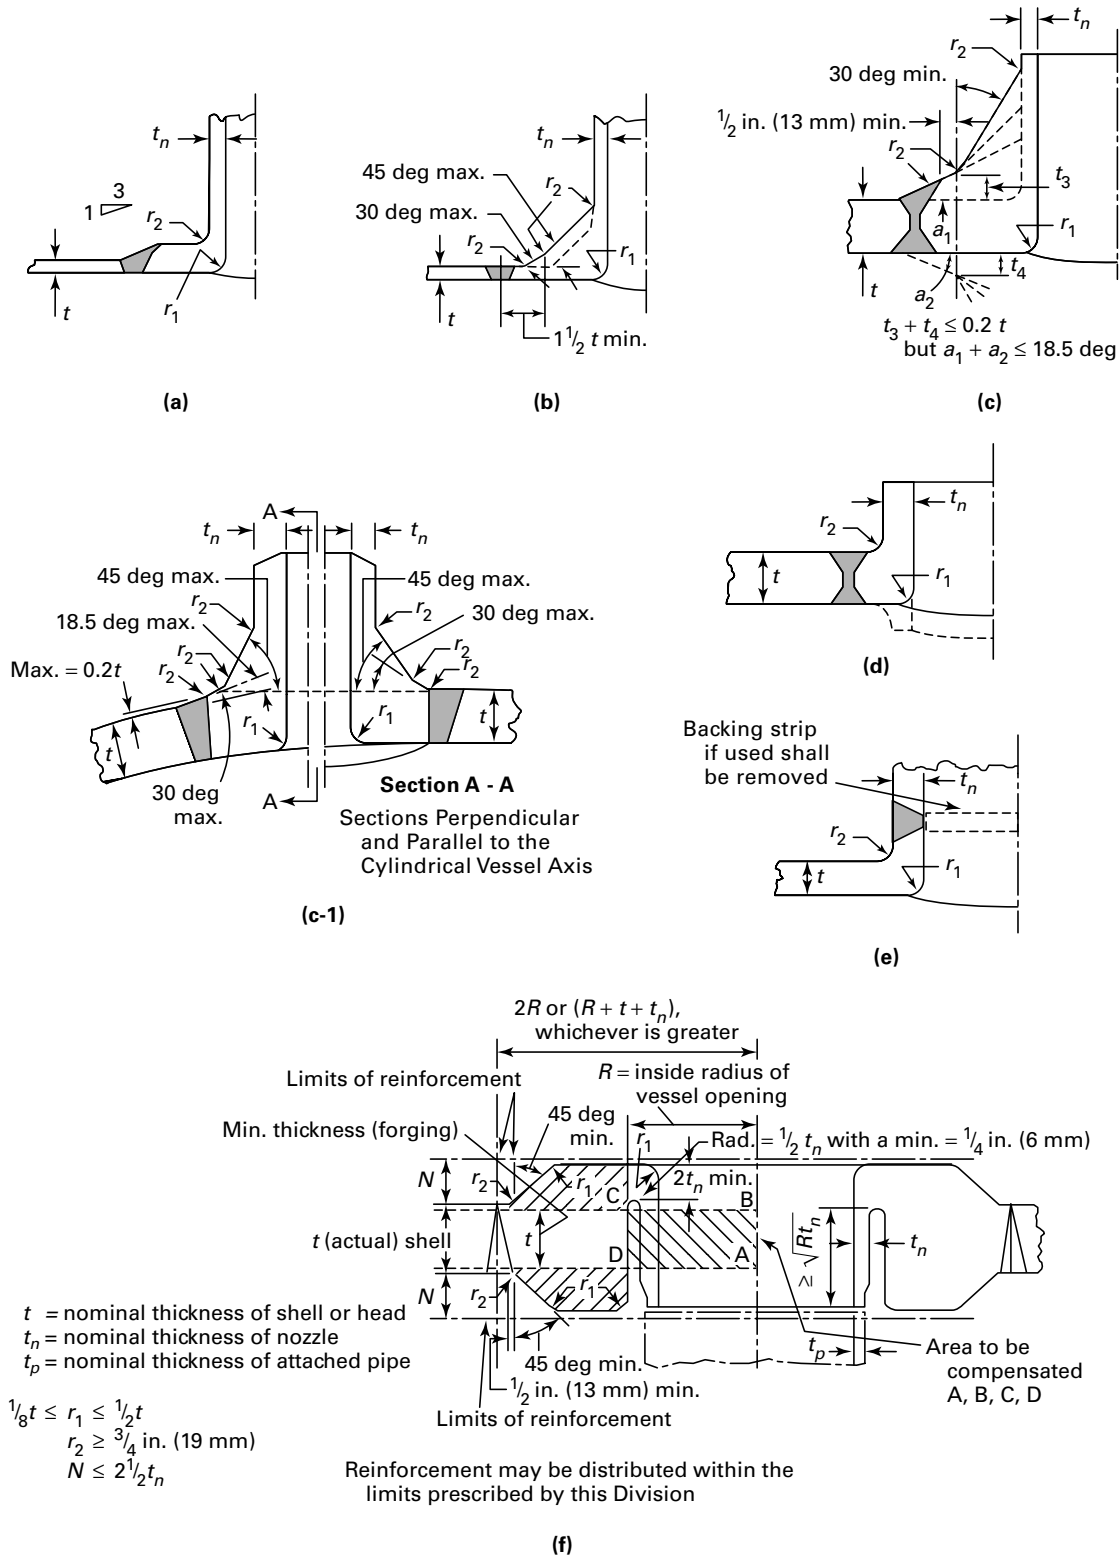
ACCEPTABLE WELDED NOZZLE ATTACHMENT READILY RADIOGRAPHED TO CODE STANDARDS
